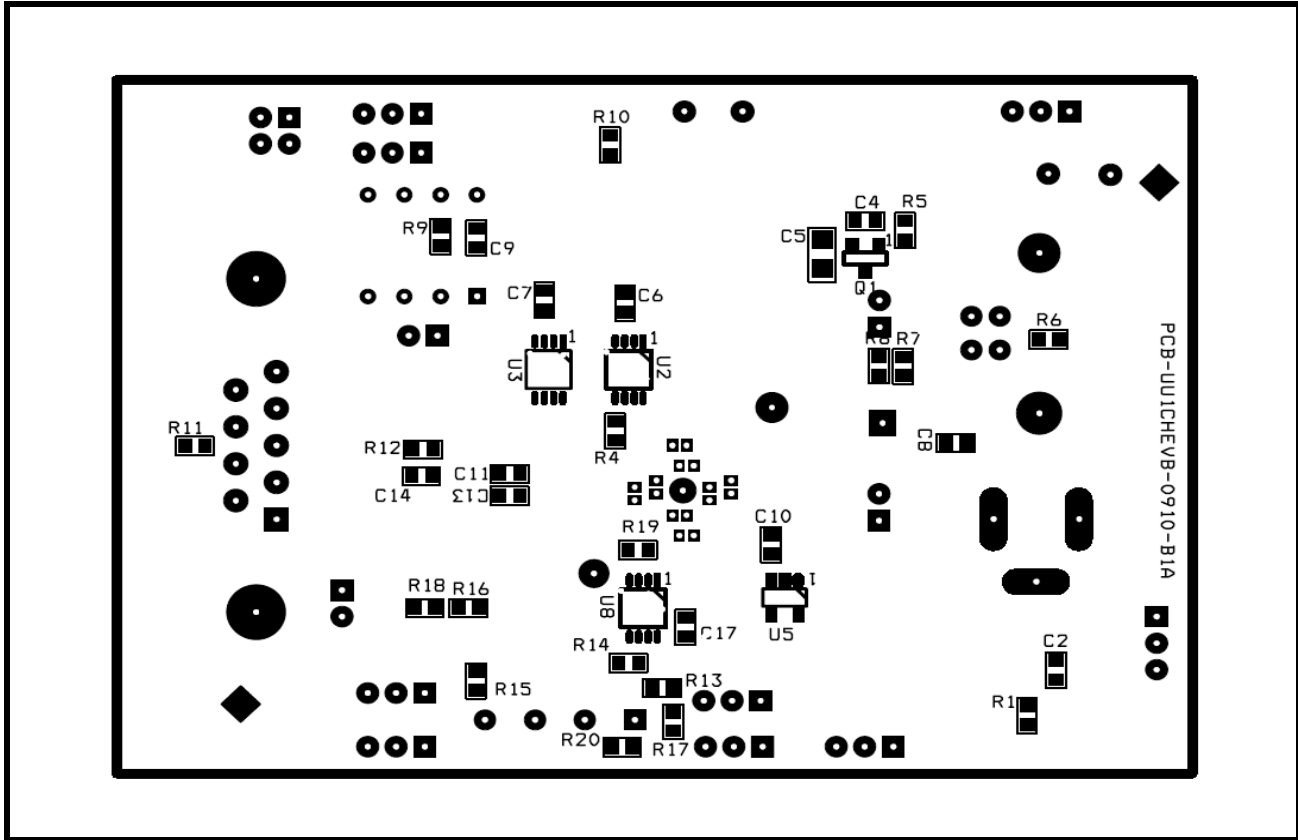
shows a bottom view of XR21V1410 evaluation board layout.
